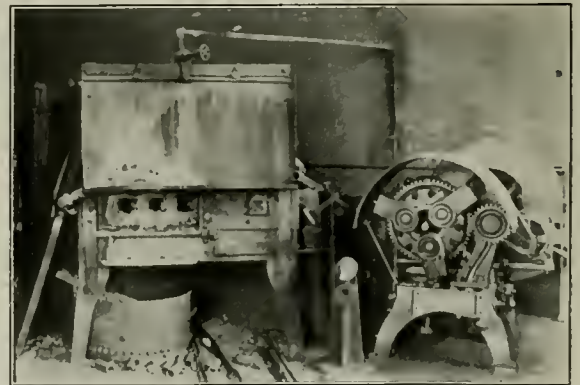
Welding Furnace and Roller Flue Welder
